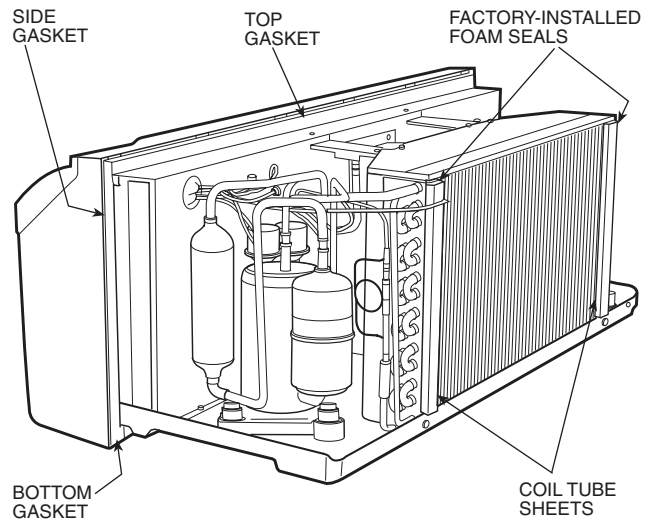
UNIT GASKETS AND TUBE SHEETS
